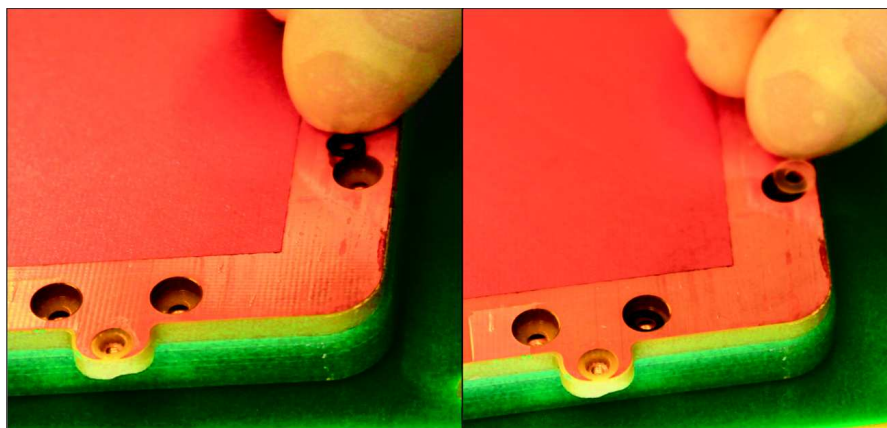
Step 16: finally, O-rings and washers are inserted in the dedicated housings of the readout board before the last screws are used to attach all the elements together and close the gas volume.
